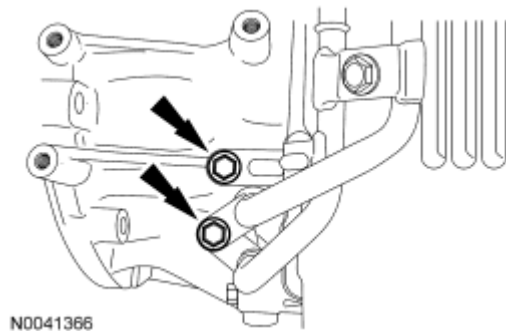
Locating Transmission Fluid Cooler Tube Bolts
